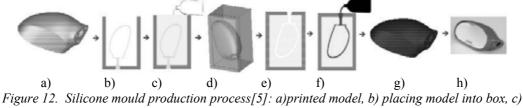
Silicone mould production process[5]: a)printed model, b) placing model into box, c) filling with silicone, d)mould parting and model removing, e) assembling mould parts, f) polyurethane pouring, g) cast, h) final product
